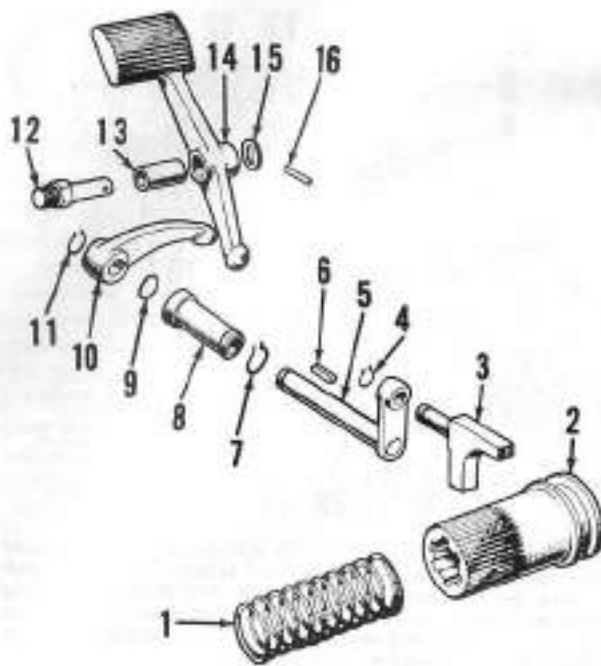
Exploded view of differential lock components. Pedal may be retained on pivot pin (12) with snap ring instead of spring pin (16).
